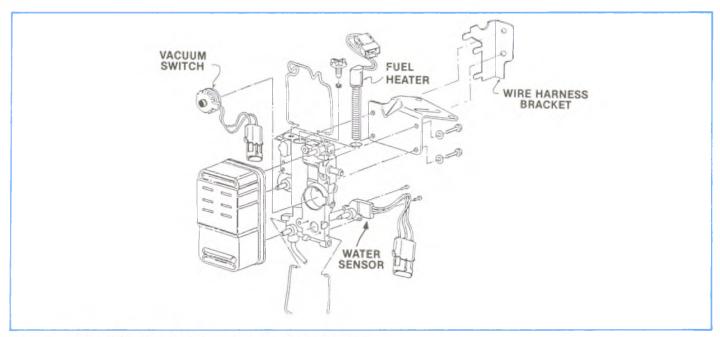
, 1985 Model 80 Filter, Exploded View.
